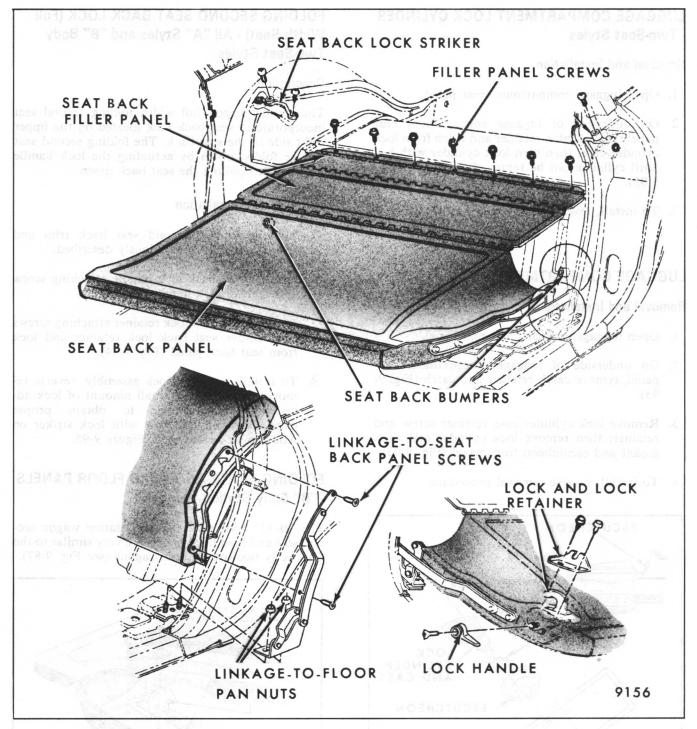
Folding Second Seat Back Linkage and Filler Panel - "A" Body Two-Seat and Three-Seat Styles
